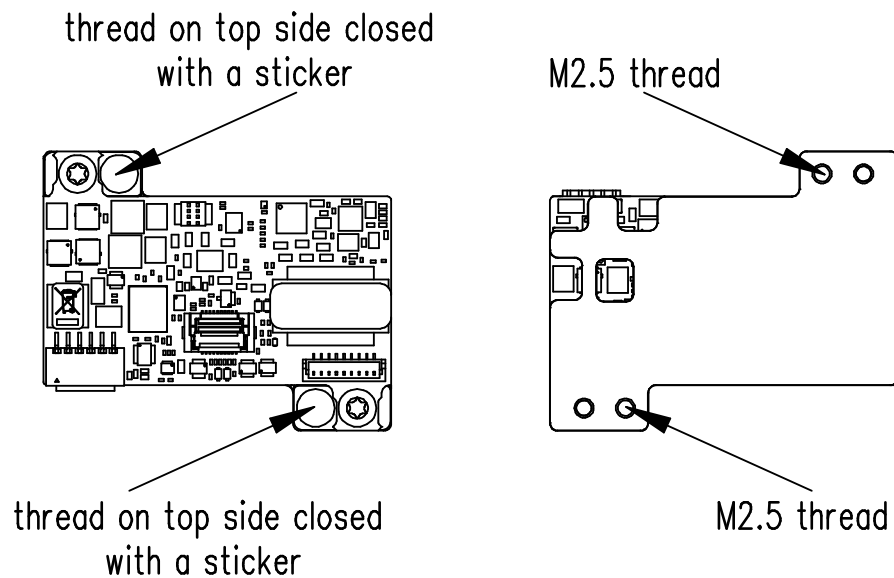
FETK-S1.1 Threads and Heat Spreader
